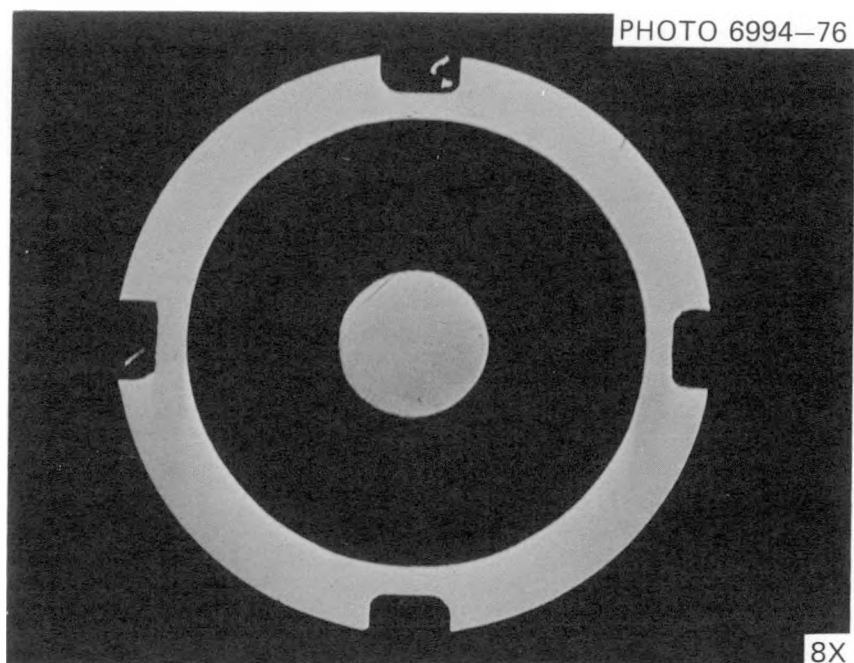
Cross section of unheated region of fuel simulator 2828007 showing proper machining of grooves.
